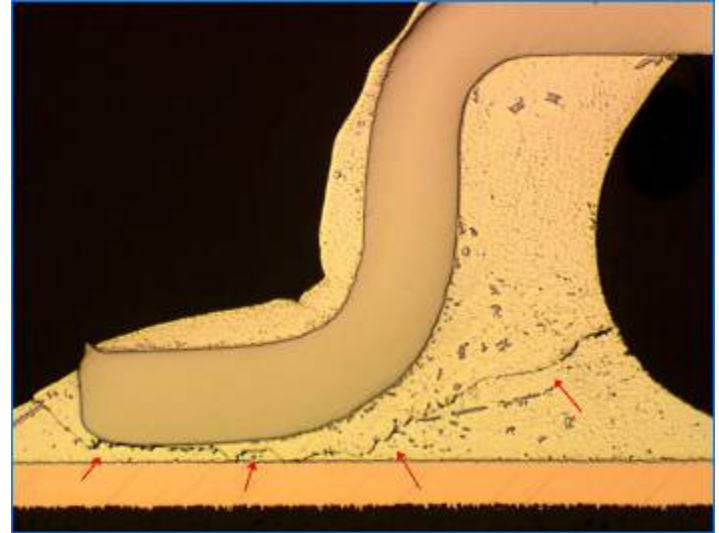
cross section, SN64, U62, left lead solder crack, 100x
